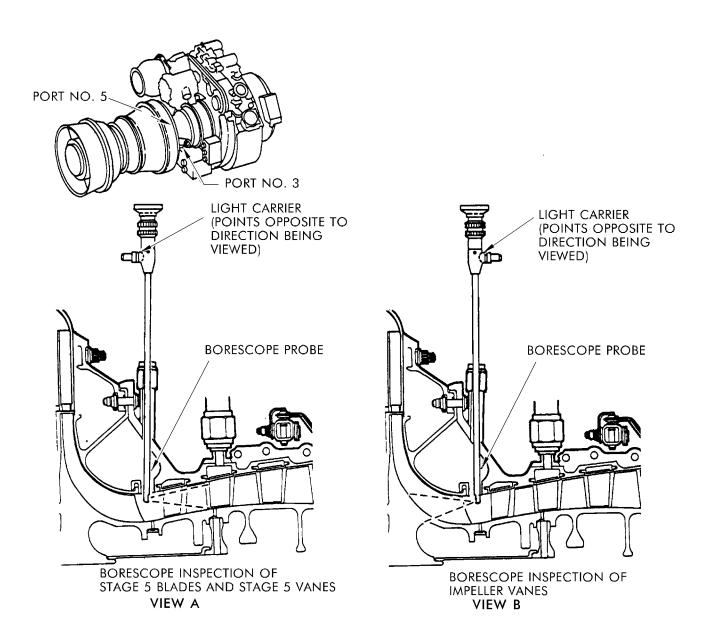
Compressor Aft Area (Port No. 3 or Port No. 5); Borescope Inspection
